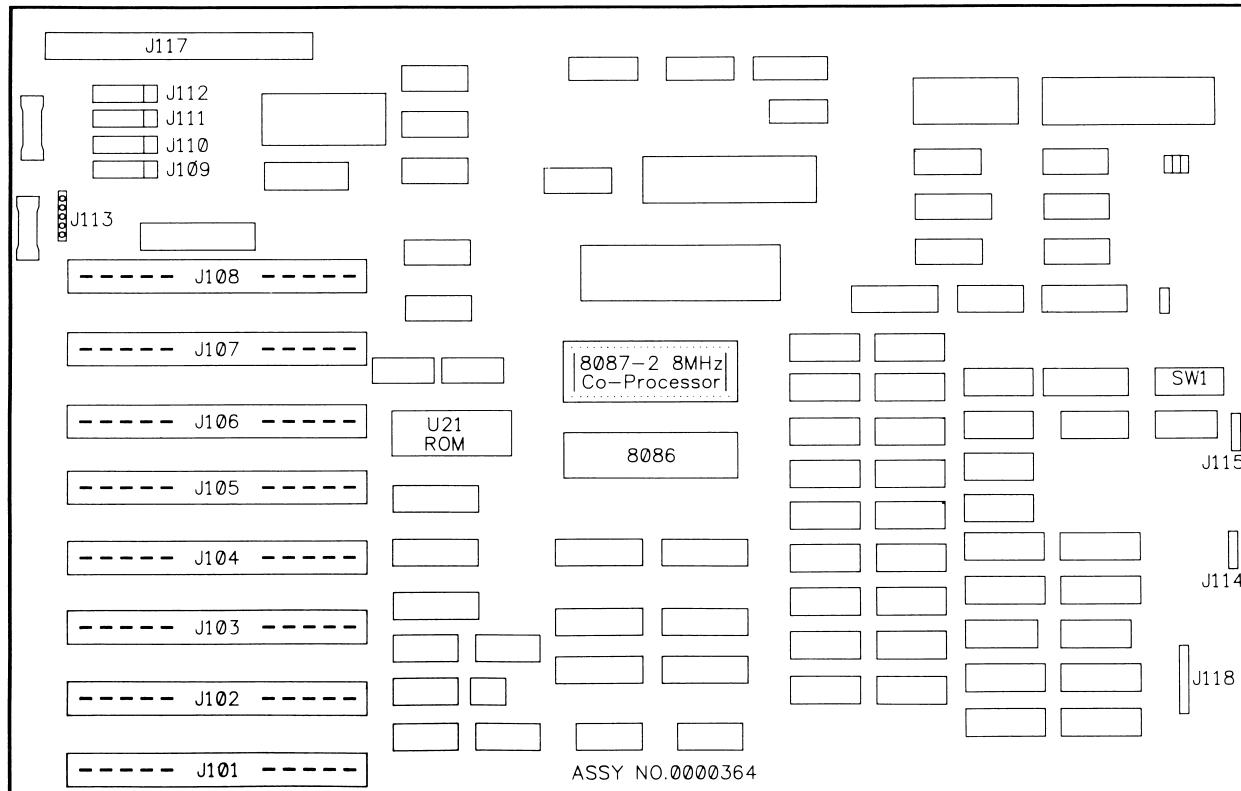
COMPAQ DESKPRO System Board Version 3 (assy. no. 000364).
